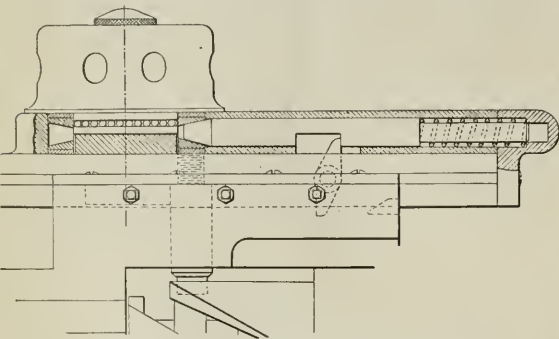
TURRET INDEXING MECHANISM OF THE "EMPIRE" AUTOMATIC MACHINE
